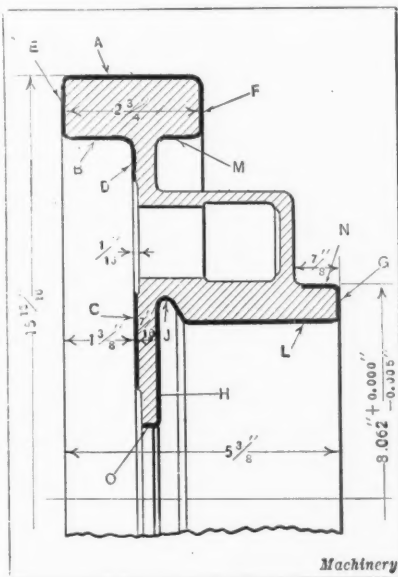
Drawing showing the Various Cuts taken on Reo Flywheels
